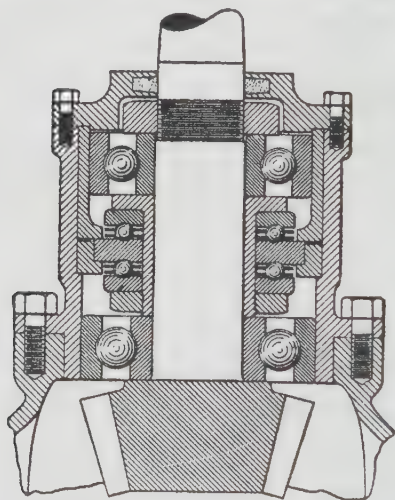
PINION SHAFT MOUNTING WITH DOUBLE THRUST BEARINGS.
